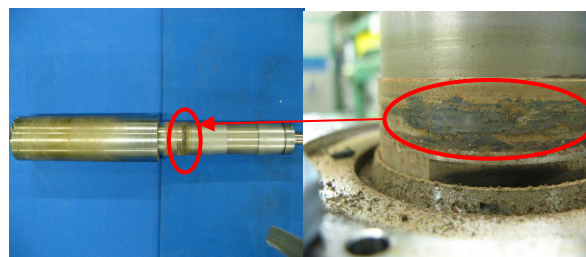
Irradiated magnetic bearing type centrifugal contactors and structure of magnetic bearing.
